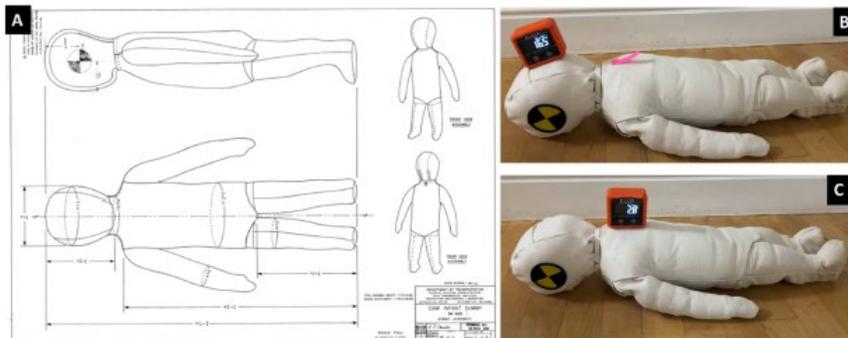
(A) Mechanical drawing and actual photos of the newborn CAMI dummy showing the (B) head angle and (C) torso angle during lying on a firm flat surface.
